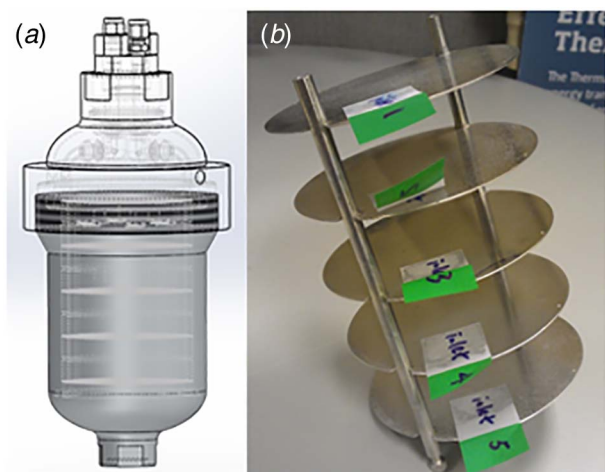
(a) MATI prototype assembly inside of a 2-L aluminum tank and (b) assembled MATI cooling plate stack
